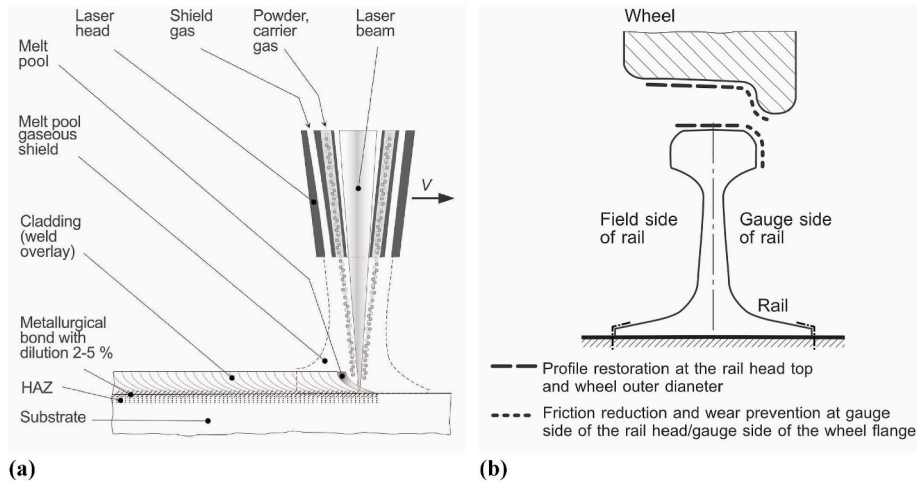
Laser cladding schematic (a) and typical rail/wheel regions for profile restoration and friction and wear reduction by weld overlay technology such as laser cladding (b).
